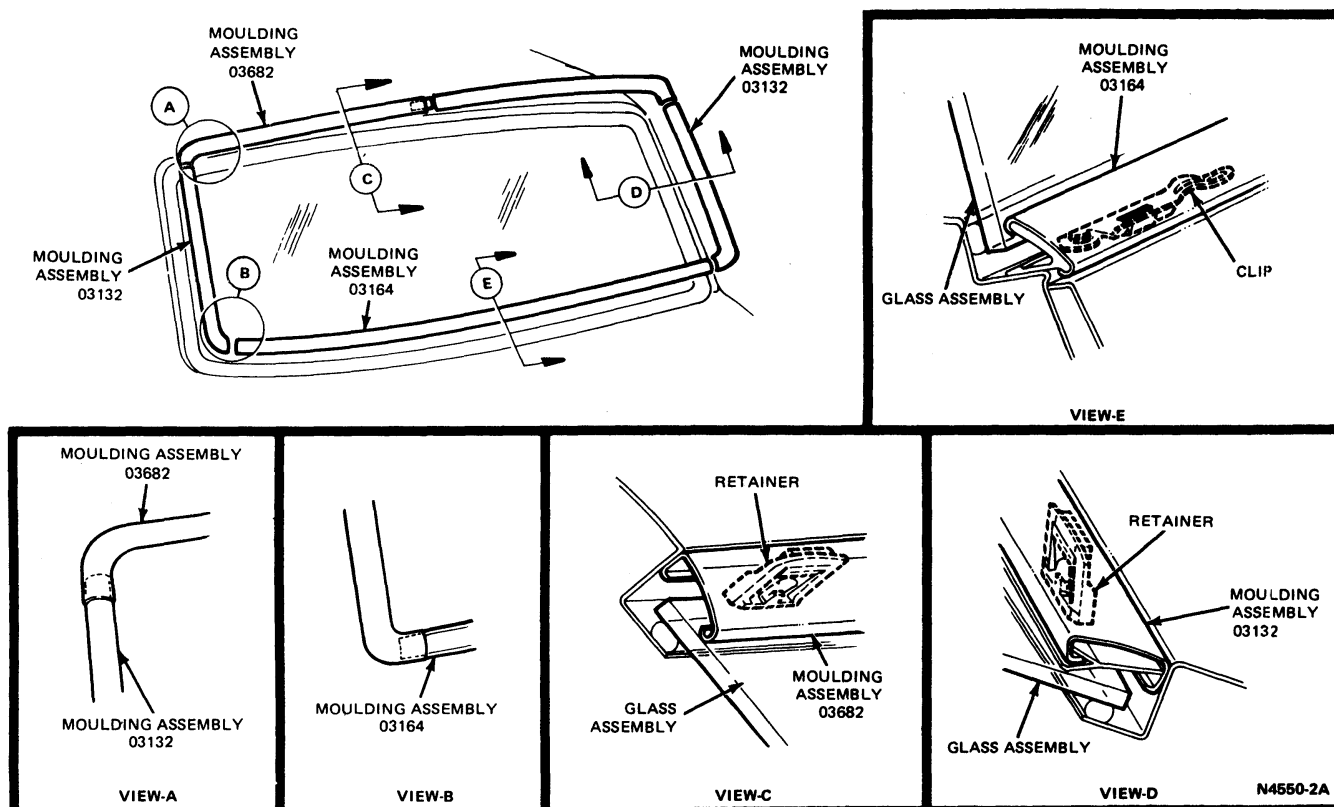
Windshield Exterior Mouldings—F-100—F-350 and Bronco
